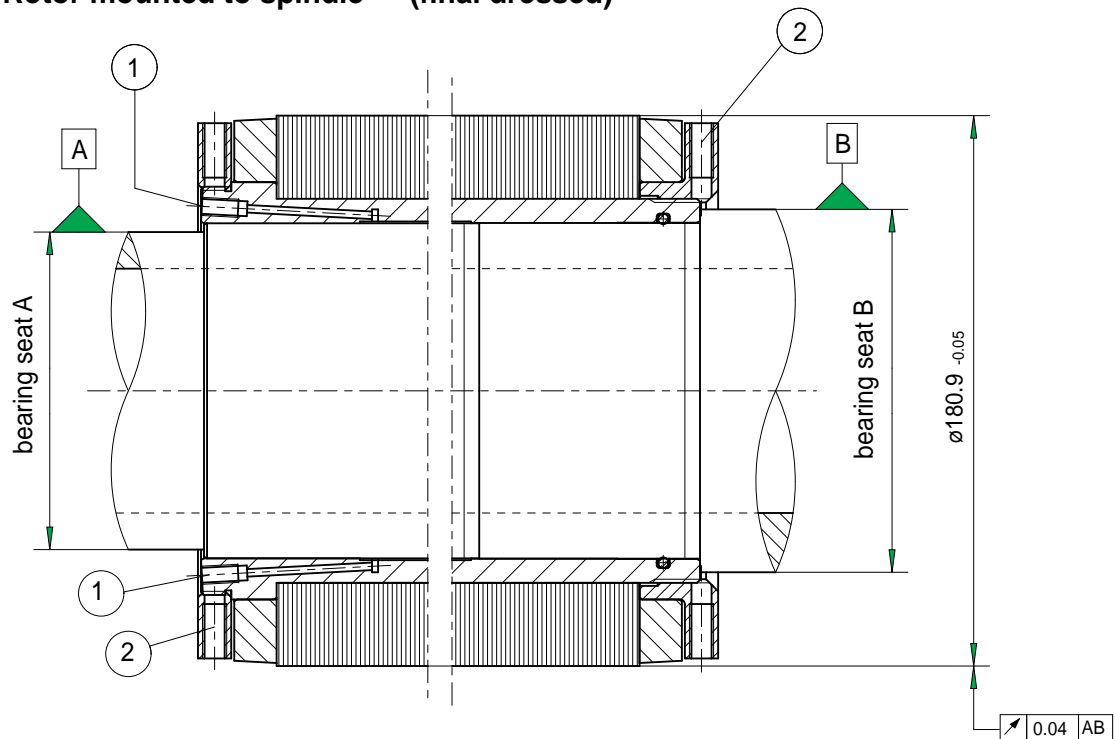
1MB 241 frameless spindle motor - dimensional data (part 2)
